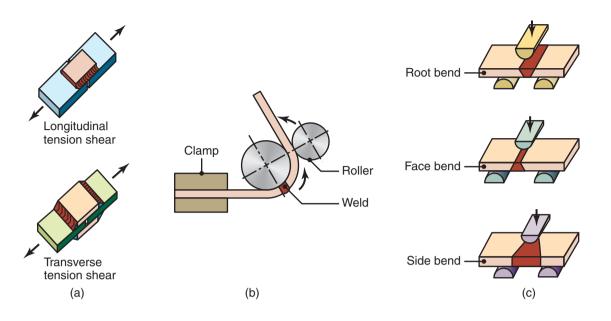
(a) Specimens for longitudinal tension-shear testing and for transfer tension-shear testing. (b) Wraparound bend-test method. (c) Three-point transverse bending of welded specimens.
